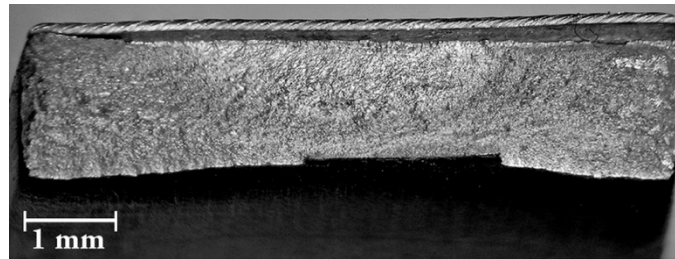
Typical fracture surface for welding conditions C ( $v = 10$  mm/s;  $\omega = 1200$  RPM) and D ( $v = 5$  mm/s;  $\omega = 600$  RPM)
